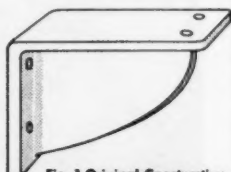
Original Construction. Machinery bracket weighs 39 pounds. Has  $\frac{3}{4}$ " and  $\frac{1}{2}$ " sections. Requires milling and drilling. Costs \$9.10.
